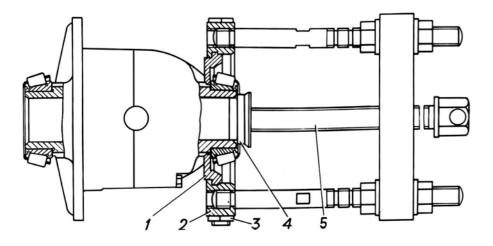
Removing the bearing inner race from the differential compensating case: 1 – insert; 2 – support; 3 – nut; 4 – thrust block; 5 – puller screw
